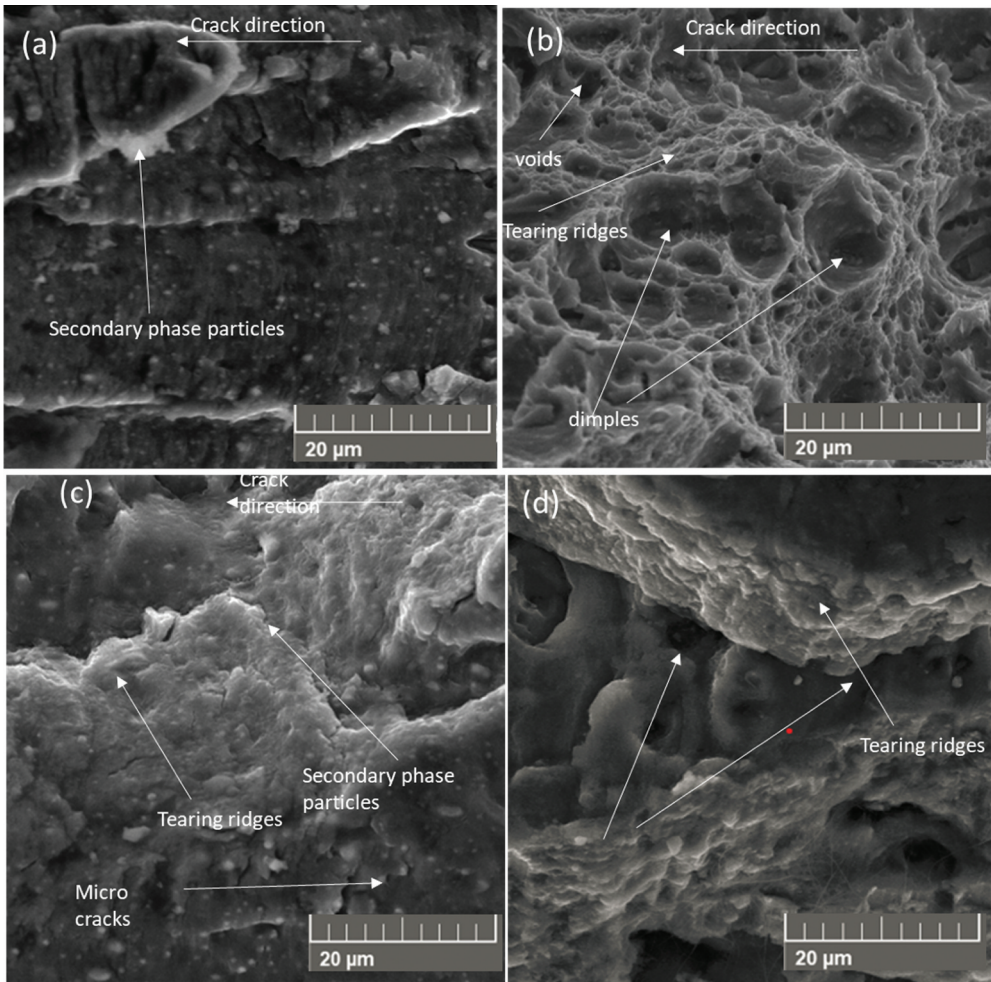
Fatigue crack propagation morphology of Al alloy 7075-O, (a) CPS- countersunk rivet hole, (b) CPF- countersunk rivet hole, (c) CPS- perpendicular rivet hole, (d) CPF - perpendicular rivet hole.
